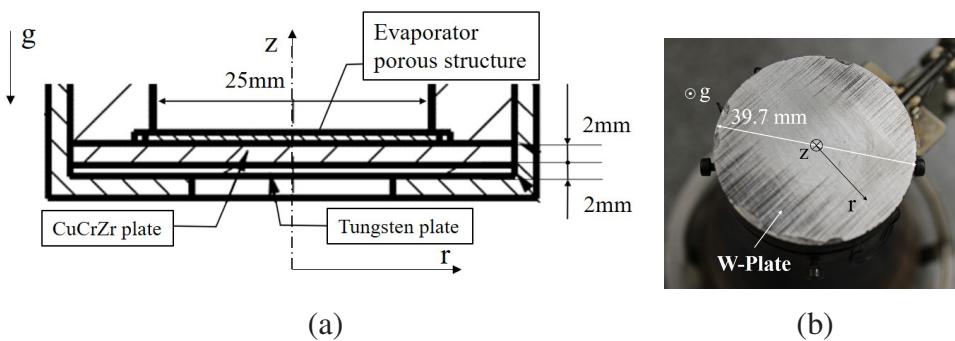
HPEE evaporator (a) drawing with dimensions of HPEE evaporator-end with W-plate; (b) top view of the outer evaporator surface with W-plate (after testing).
